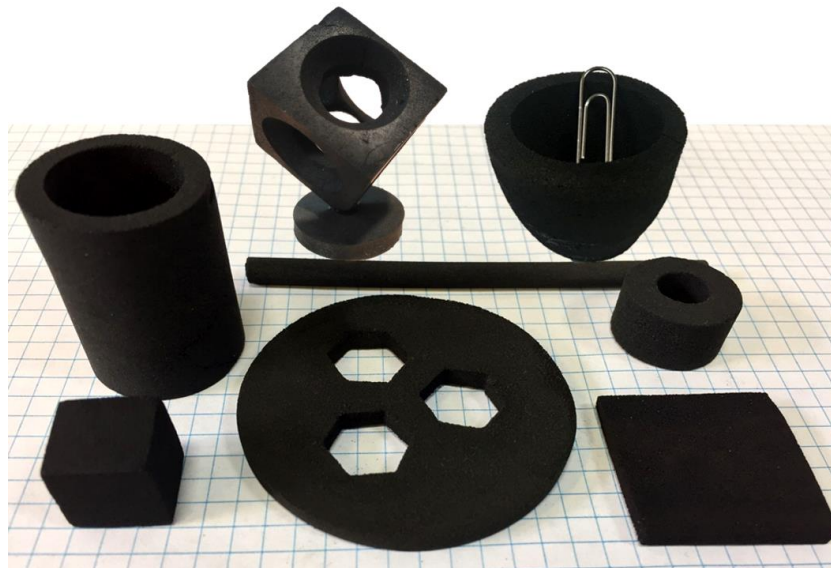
Some of the porous carbon structures obtained by casting and machining.
